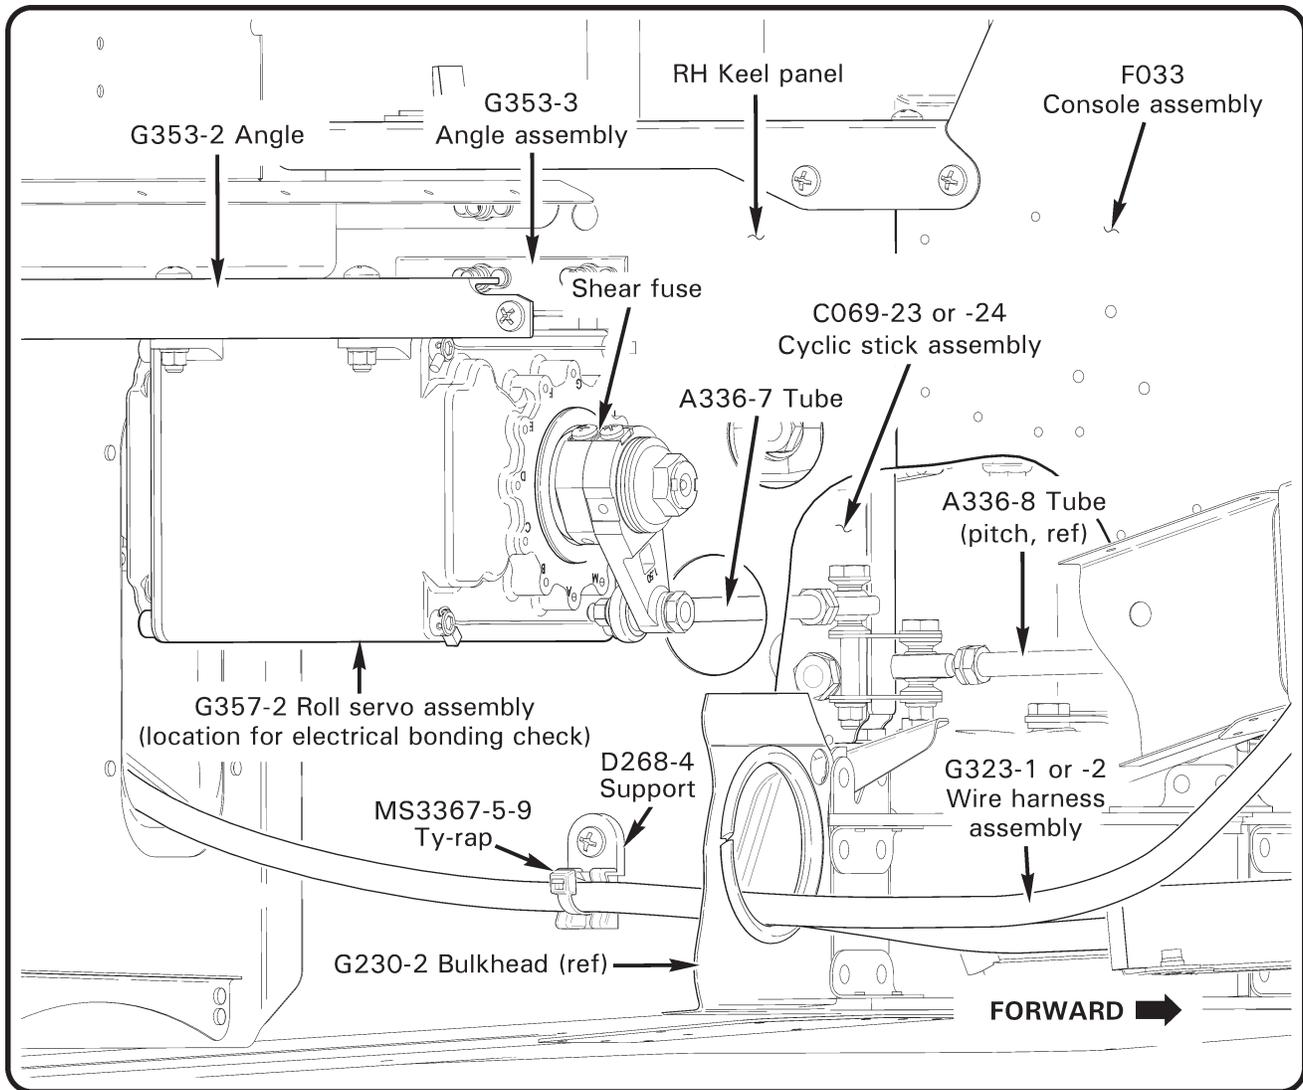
GARMIN FCS – ROLL SERVO ASSEMBLY
